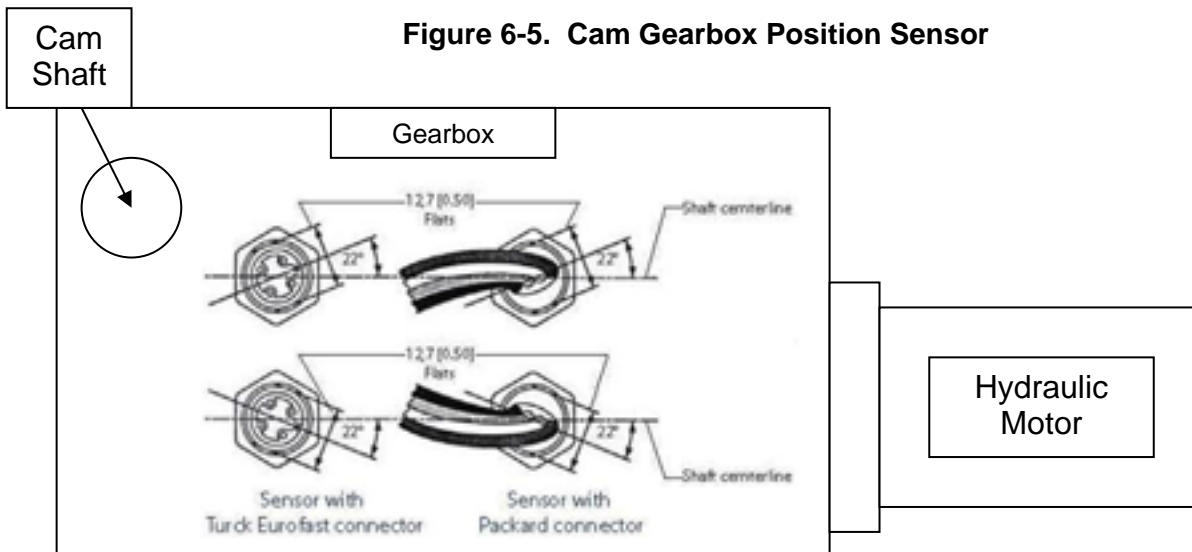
Cam Gearbox Position Sensor 22deg view
